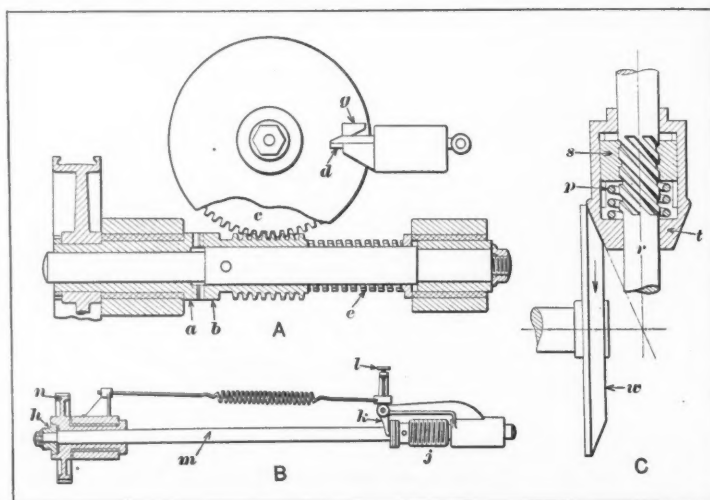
(A) and (B) Devices for automatically disengaging Driven Member whenever Resistance to Motion increases excessively. (C) Friction Gearing designed to vary Contact Pressure According to Load
